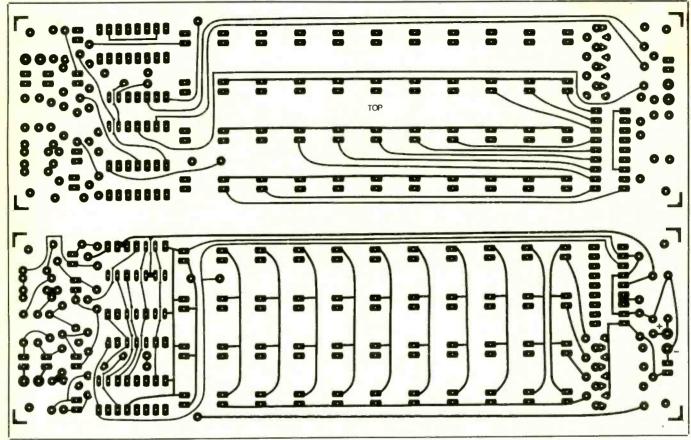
Actual-size etching-and-drilling guides for top and bottom of double-sided printed-circuit board.
